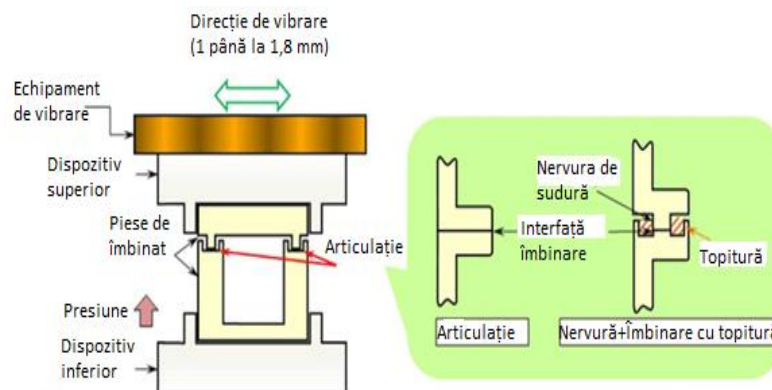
The scheme of the vibration welding process involving sinusoidal oscillations in the longitudinal direction,[10]
